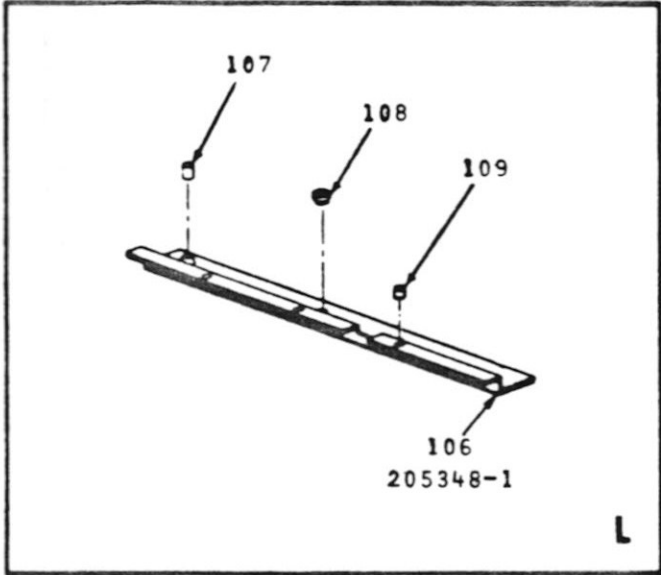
DPAV Exploded View (Sheet 5 of 5)
